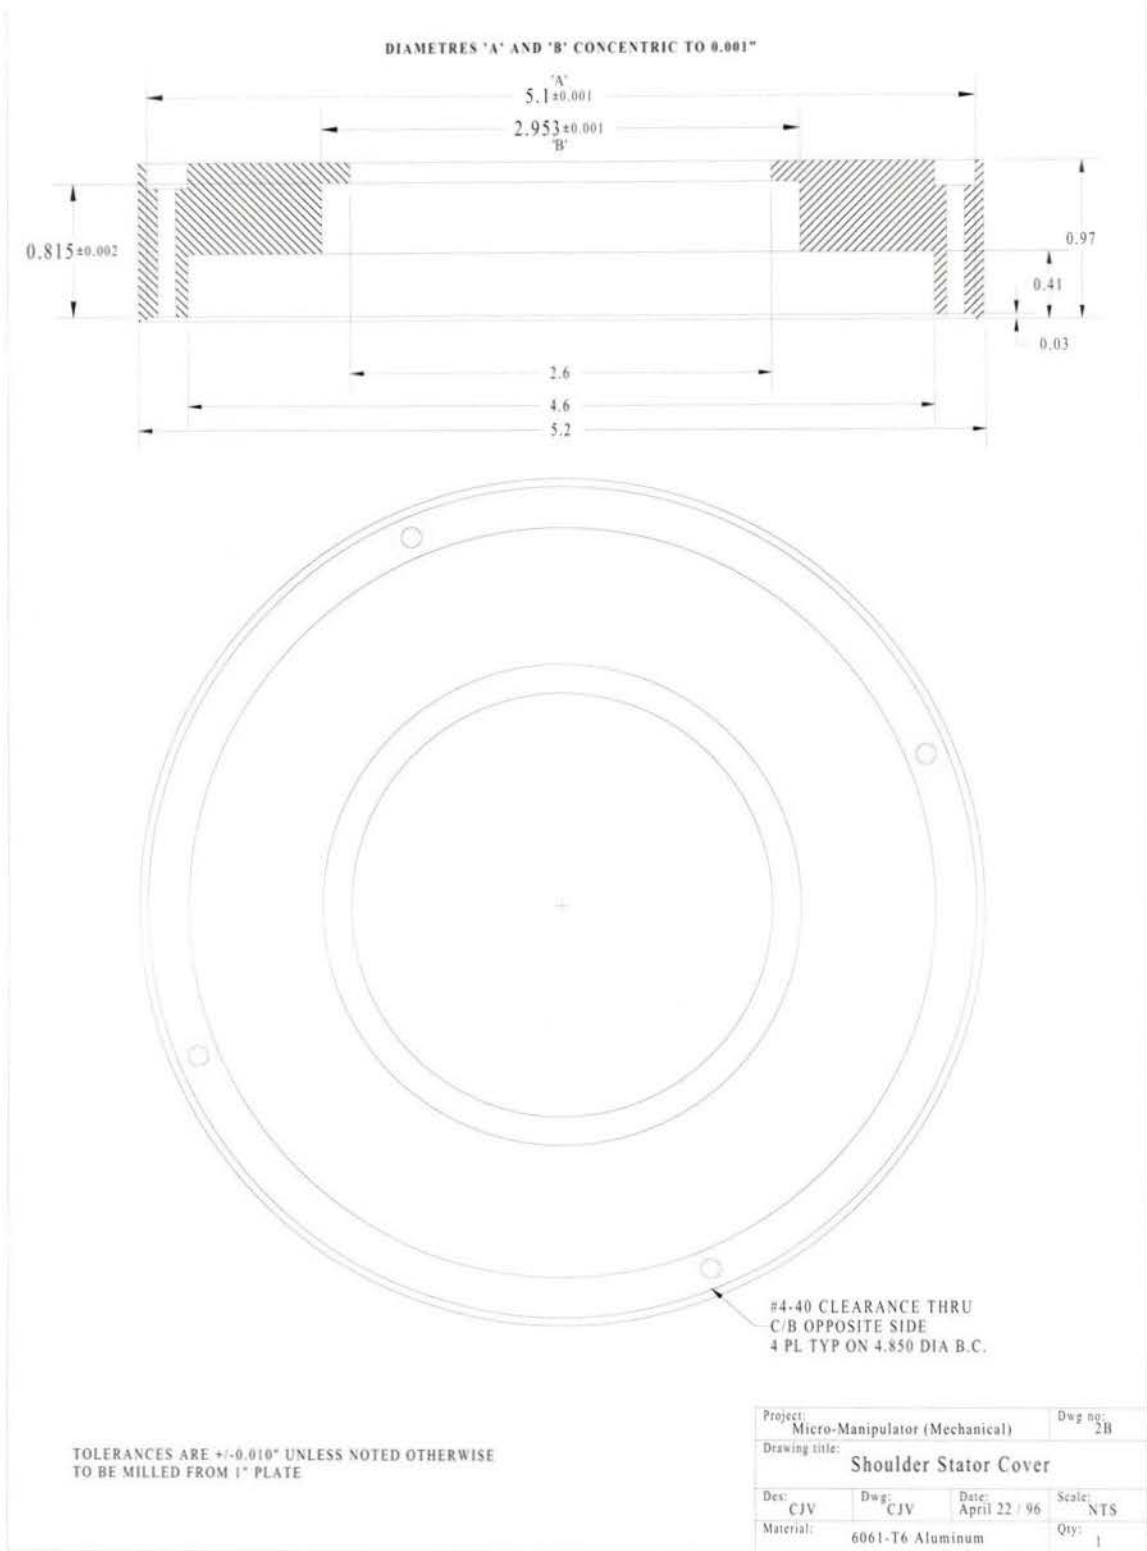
SARA Shoulder Joint: Stator Housing Cover
